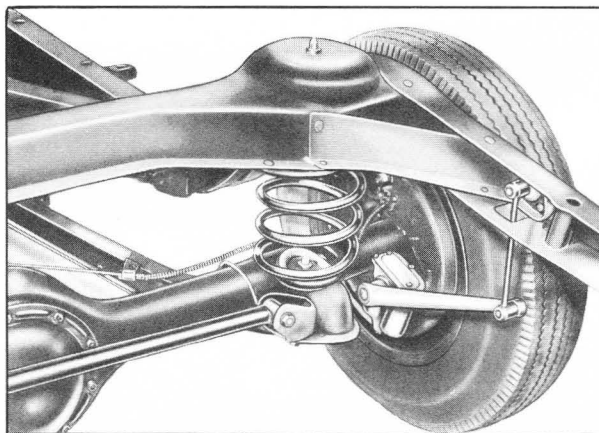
Rear Wheel Suspension—Series 40 & 1949 Series 50-70
